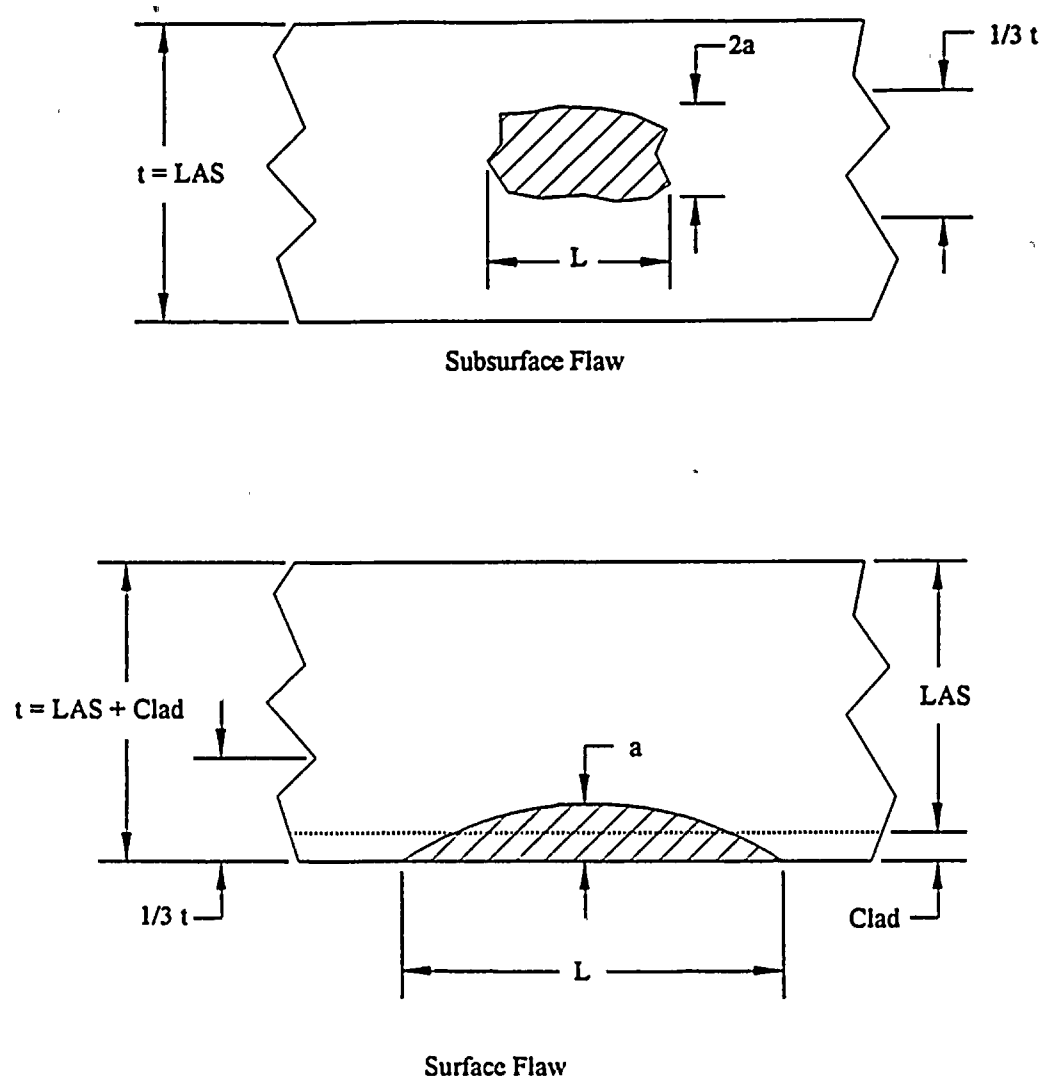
Flaw geometry for typical planar surface and subsurface defects.
